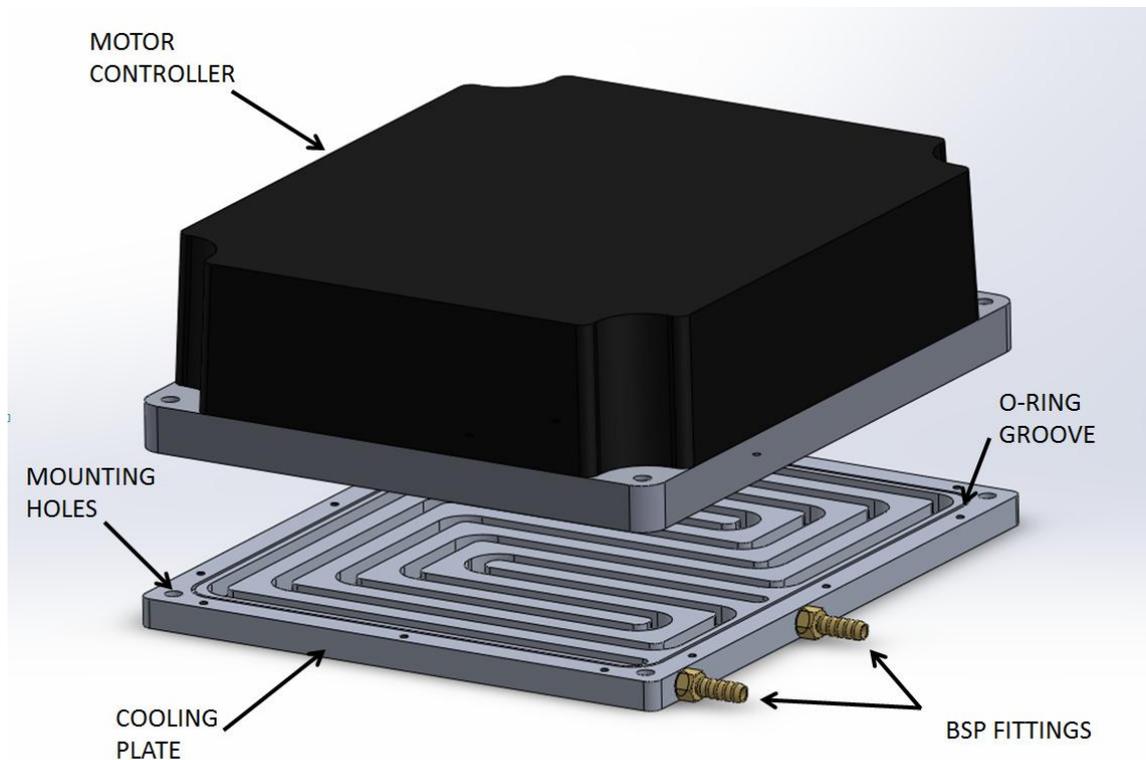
Motor controller and cooling plate assembly designed for the REVjet
